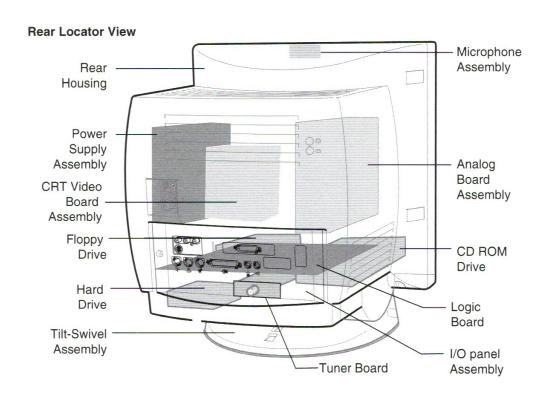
Power Macintosh/Performa 5000 Other Boards and Locator View
